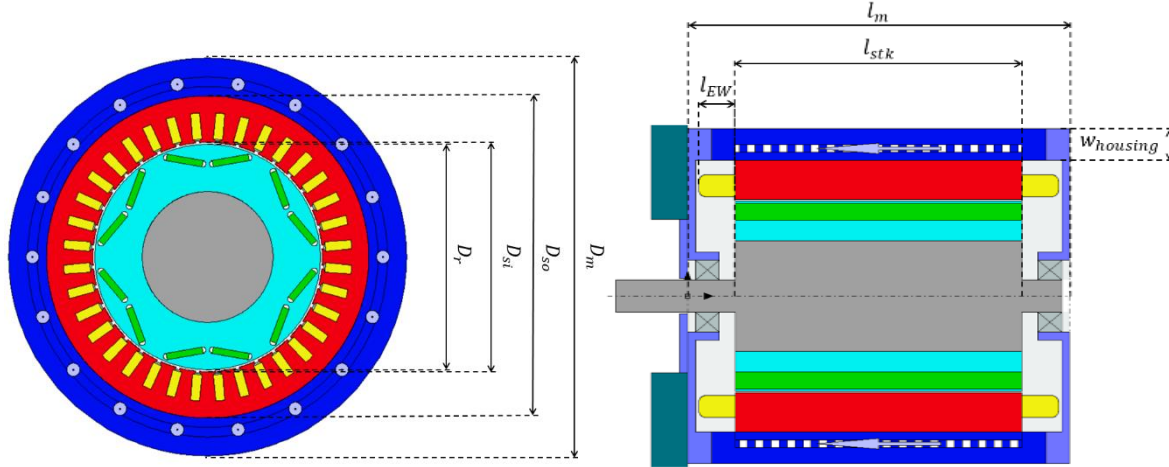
Radial and axial cross section view of the MGU011 Motor-CAD Model.
